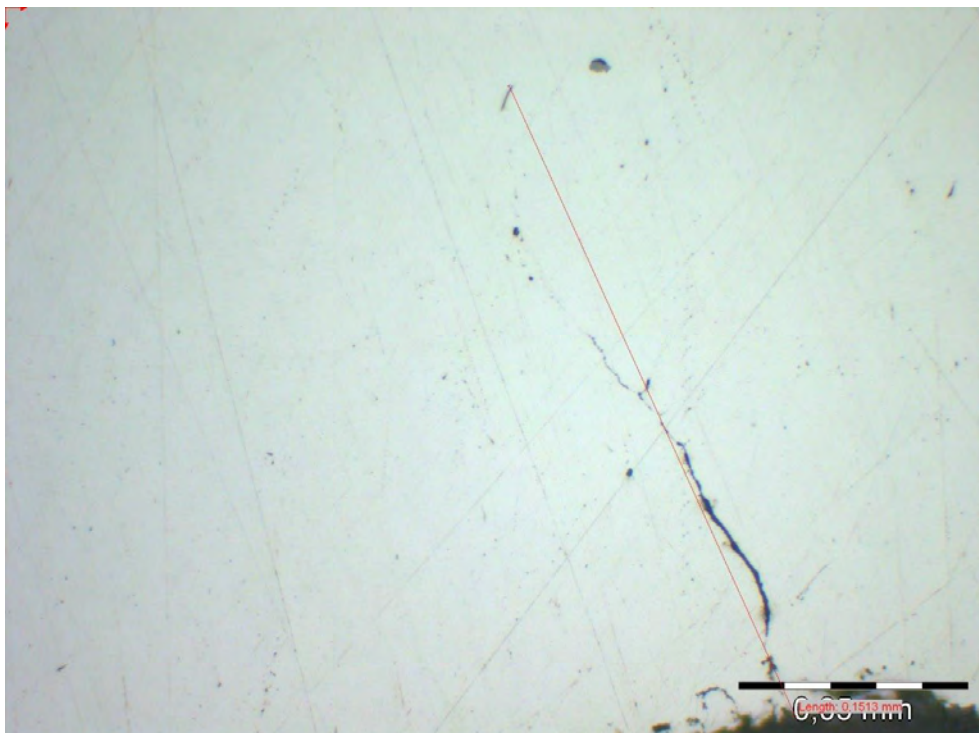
Crack at segment A, third ridge on barrel no. SFK 0120-A
